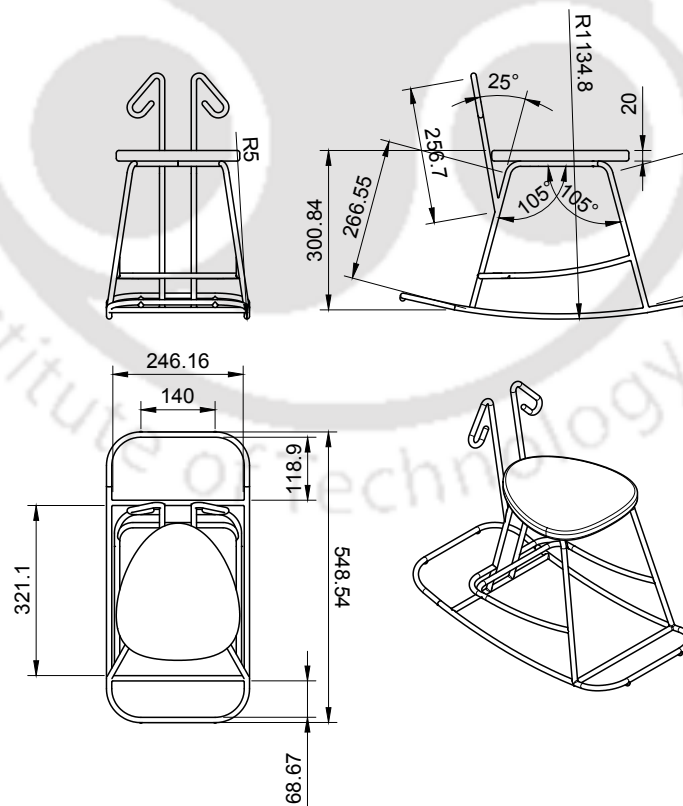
Dimensional drawing (all dimensions are in mm)
